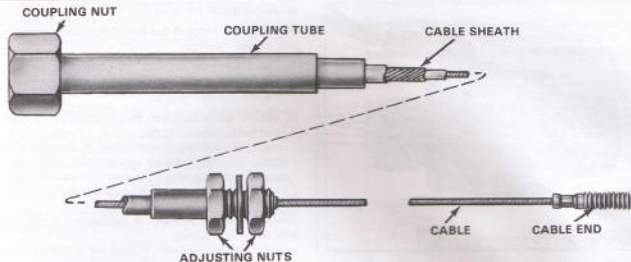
THROTTLE CABLE ASSEMBLY
